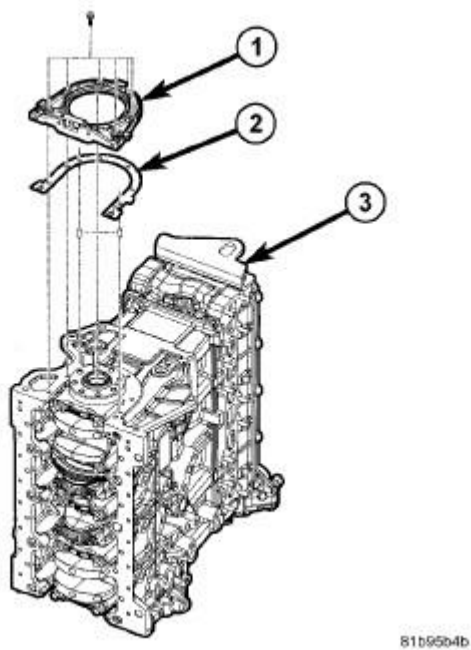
Rear Crankshaft Seal & Rear Main Oil Seal Carrier
